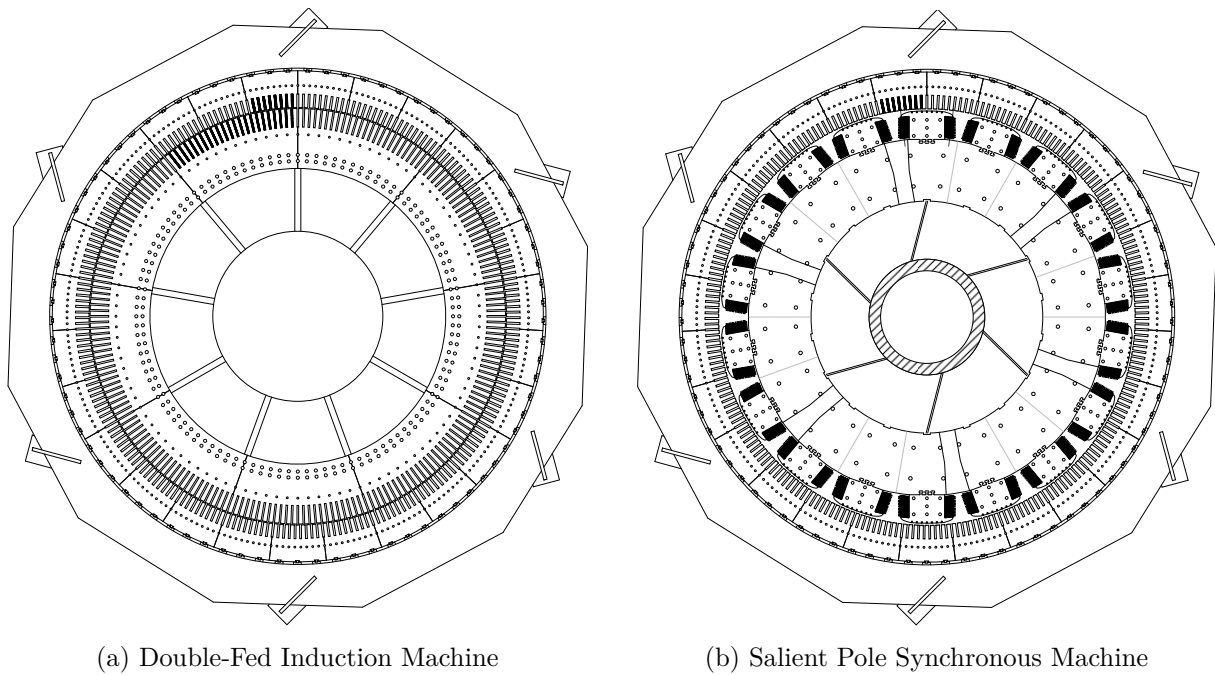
Cross section of the two machines (from Alstom design tool)
